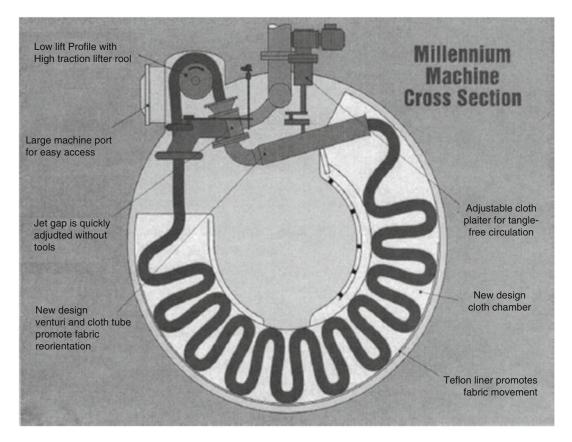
Millennium jet dyeing machine (courtesy of Gaston County Dyeing Machine Co.)
